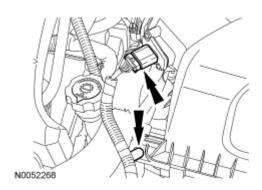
Locating Brake Booster Vacuum Hose Courtesy of FORD MOTOR CO.
